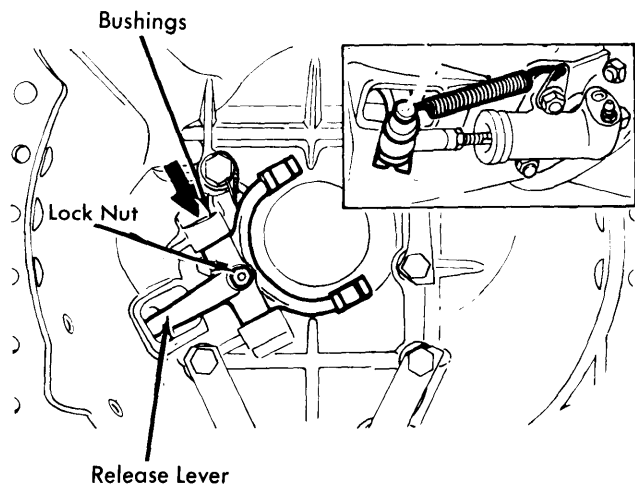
Installed View of Clutch Release Lever Showing Location of Lock Nut
